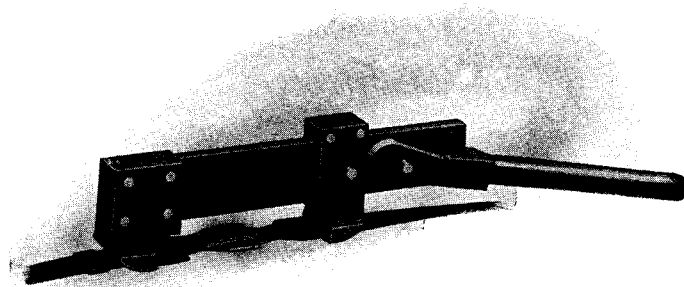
TOOL FOR ASSEMBLING SECTIONAL BAND, CLOSED POSITION
